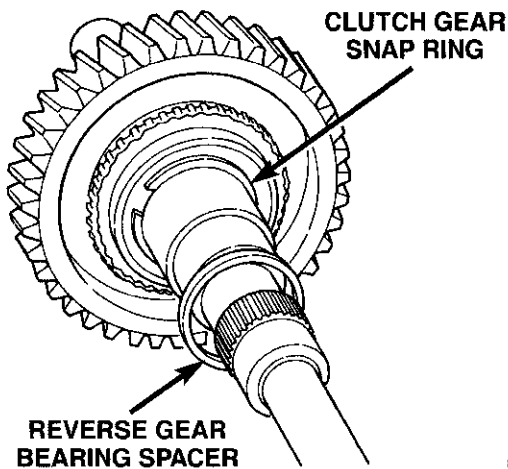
Reverse Gear, Bearing, And Stop Ring Removal
